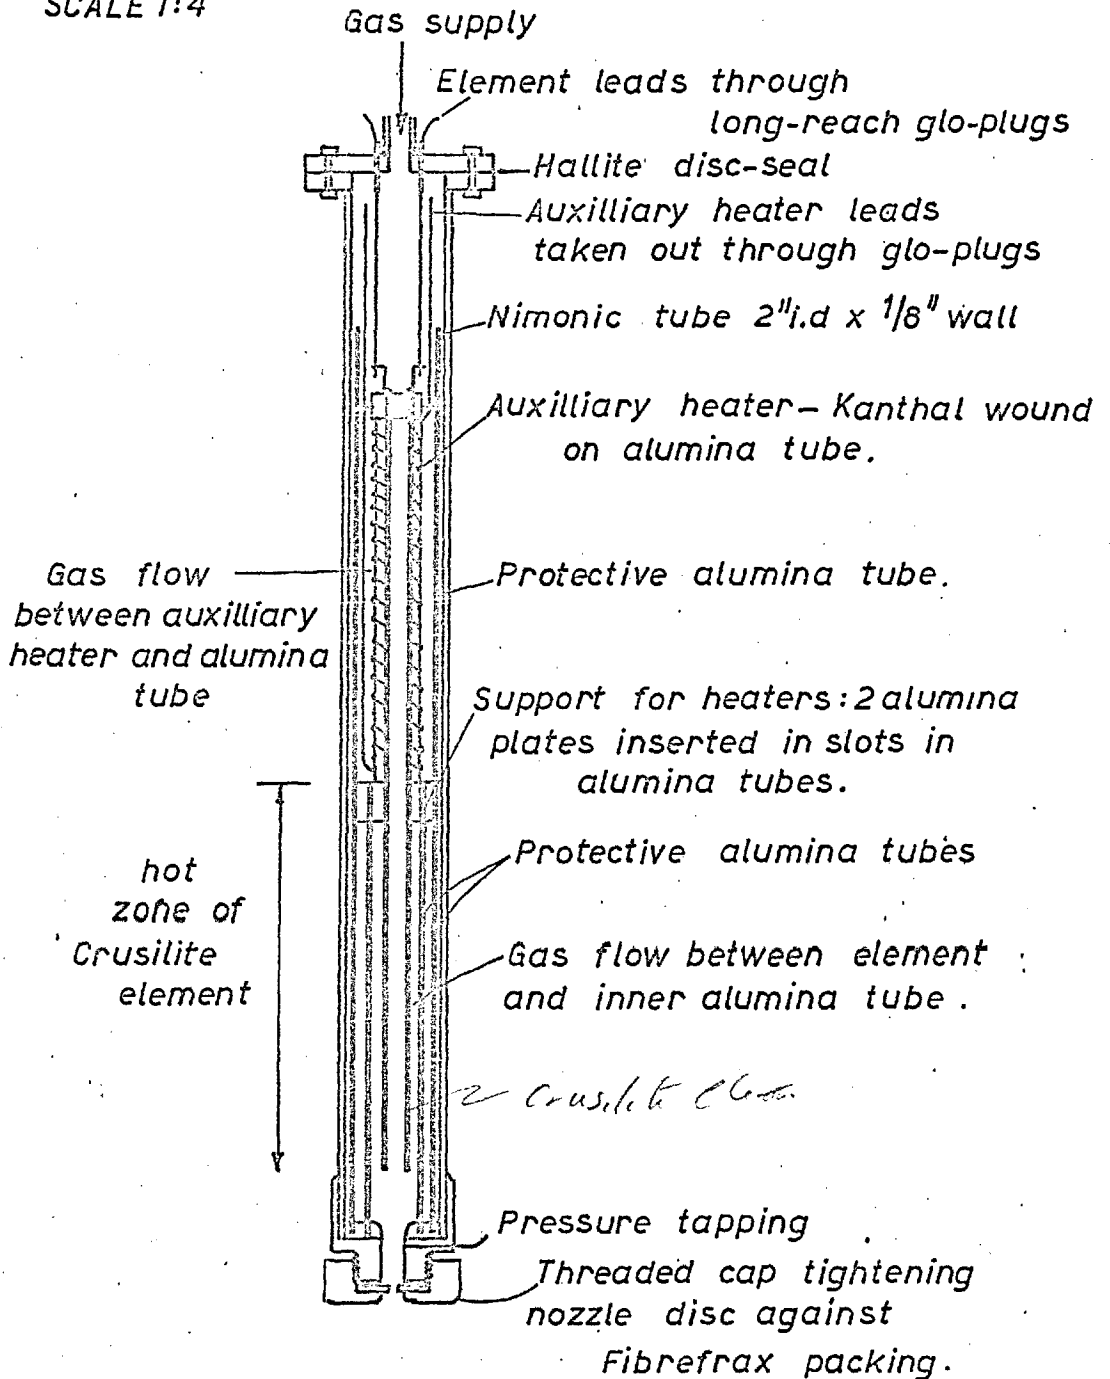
DETAILS OF LANCE CONSTRUCTION
